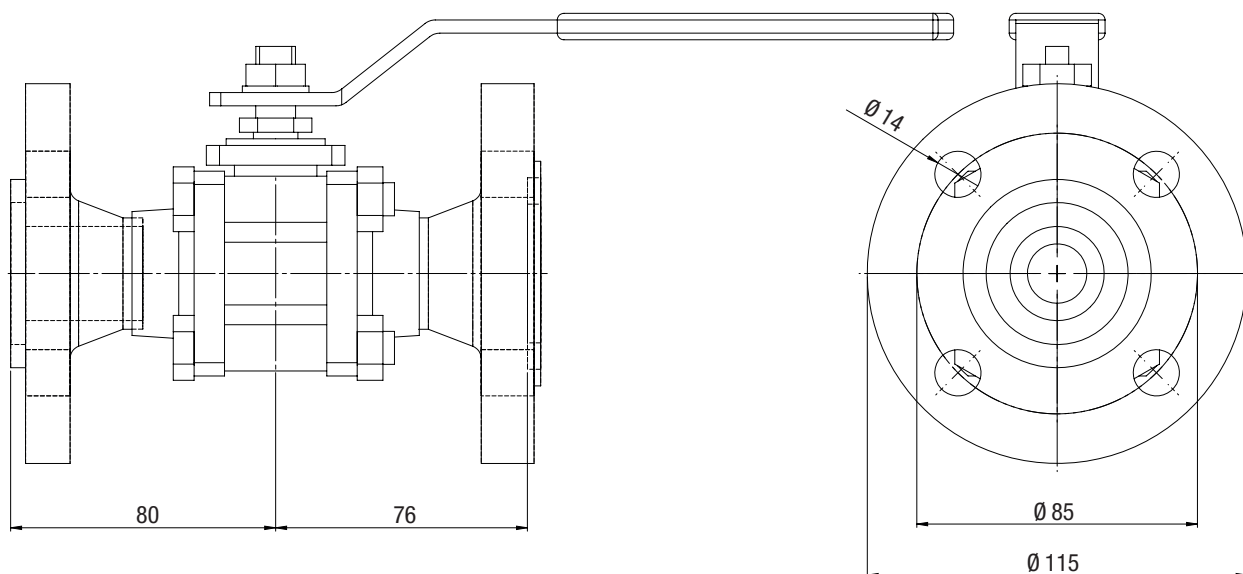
Dimensional drawing of the ball valve with flange (without stop pins)
